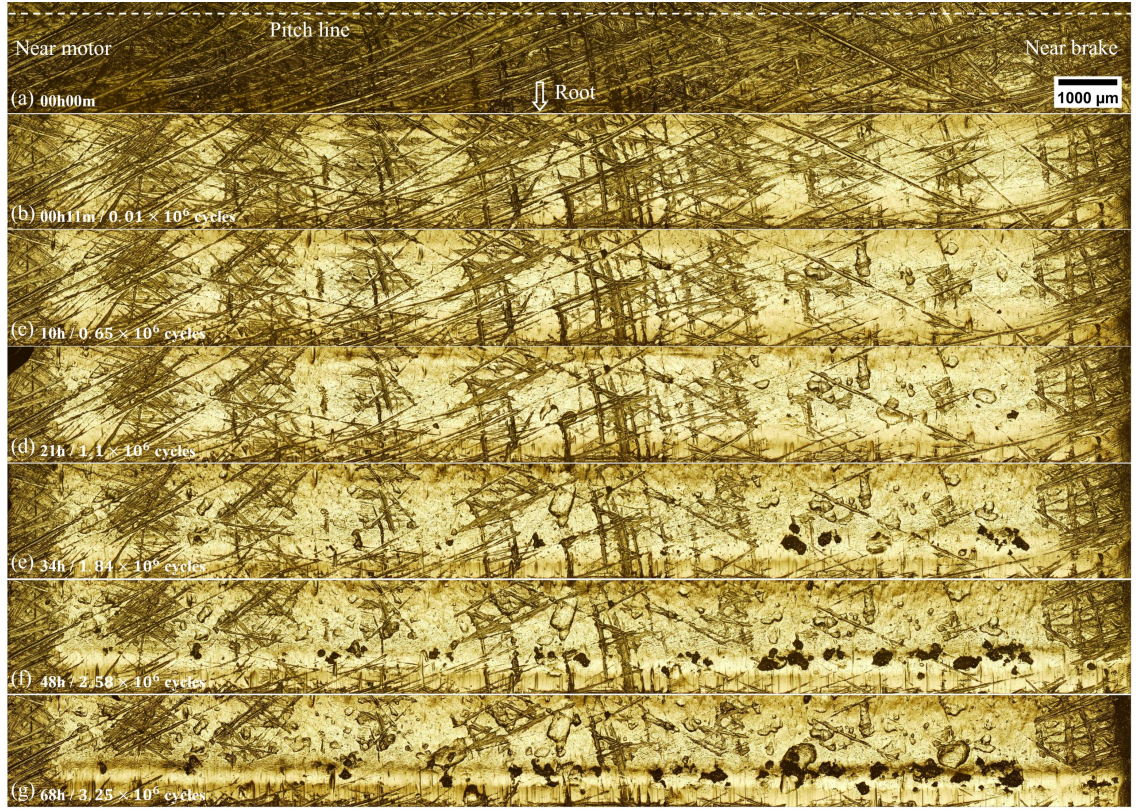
(a-g) Wear evolution on the dedendum of driven gear tooth 1 (0-68 hours; 0-3.25 million cycles).
